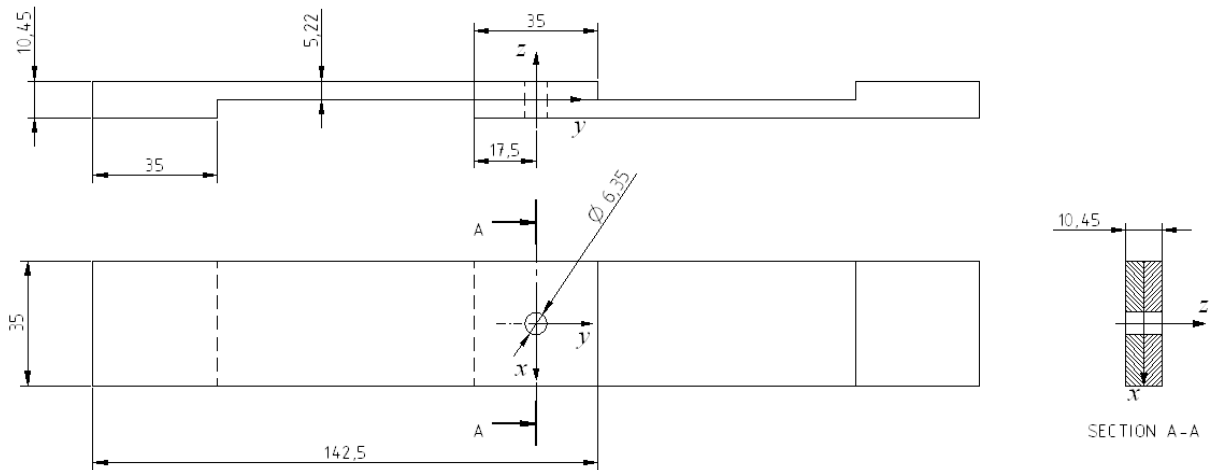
Shape and dimensions (in mm) of the single lap joint.
